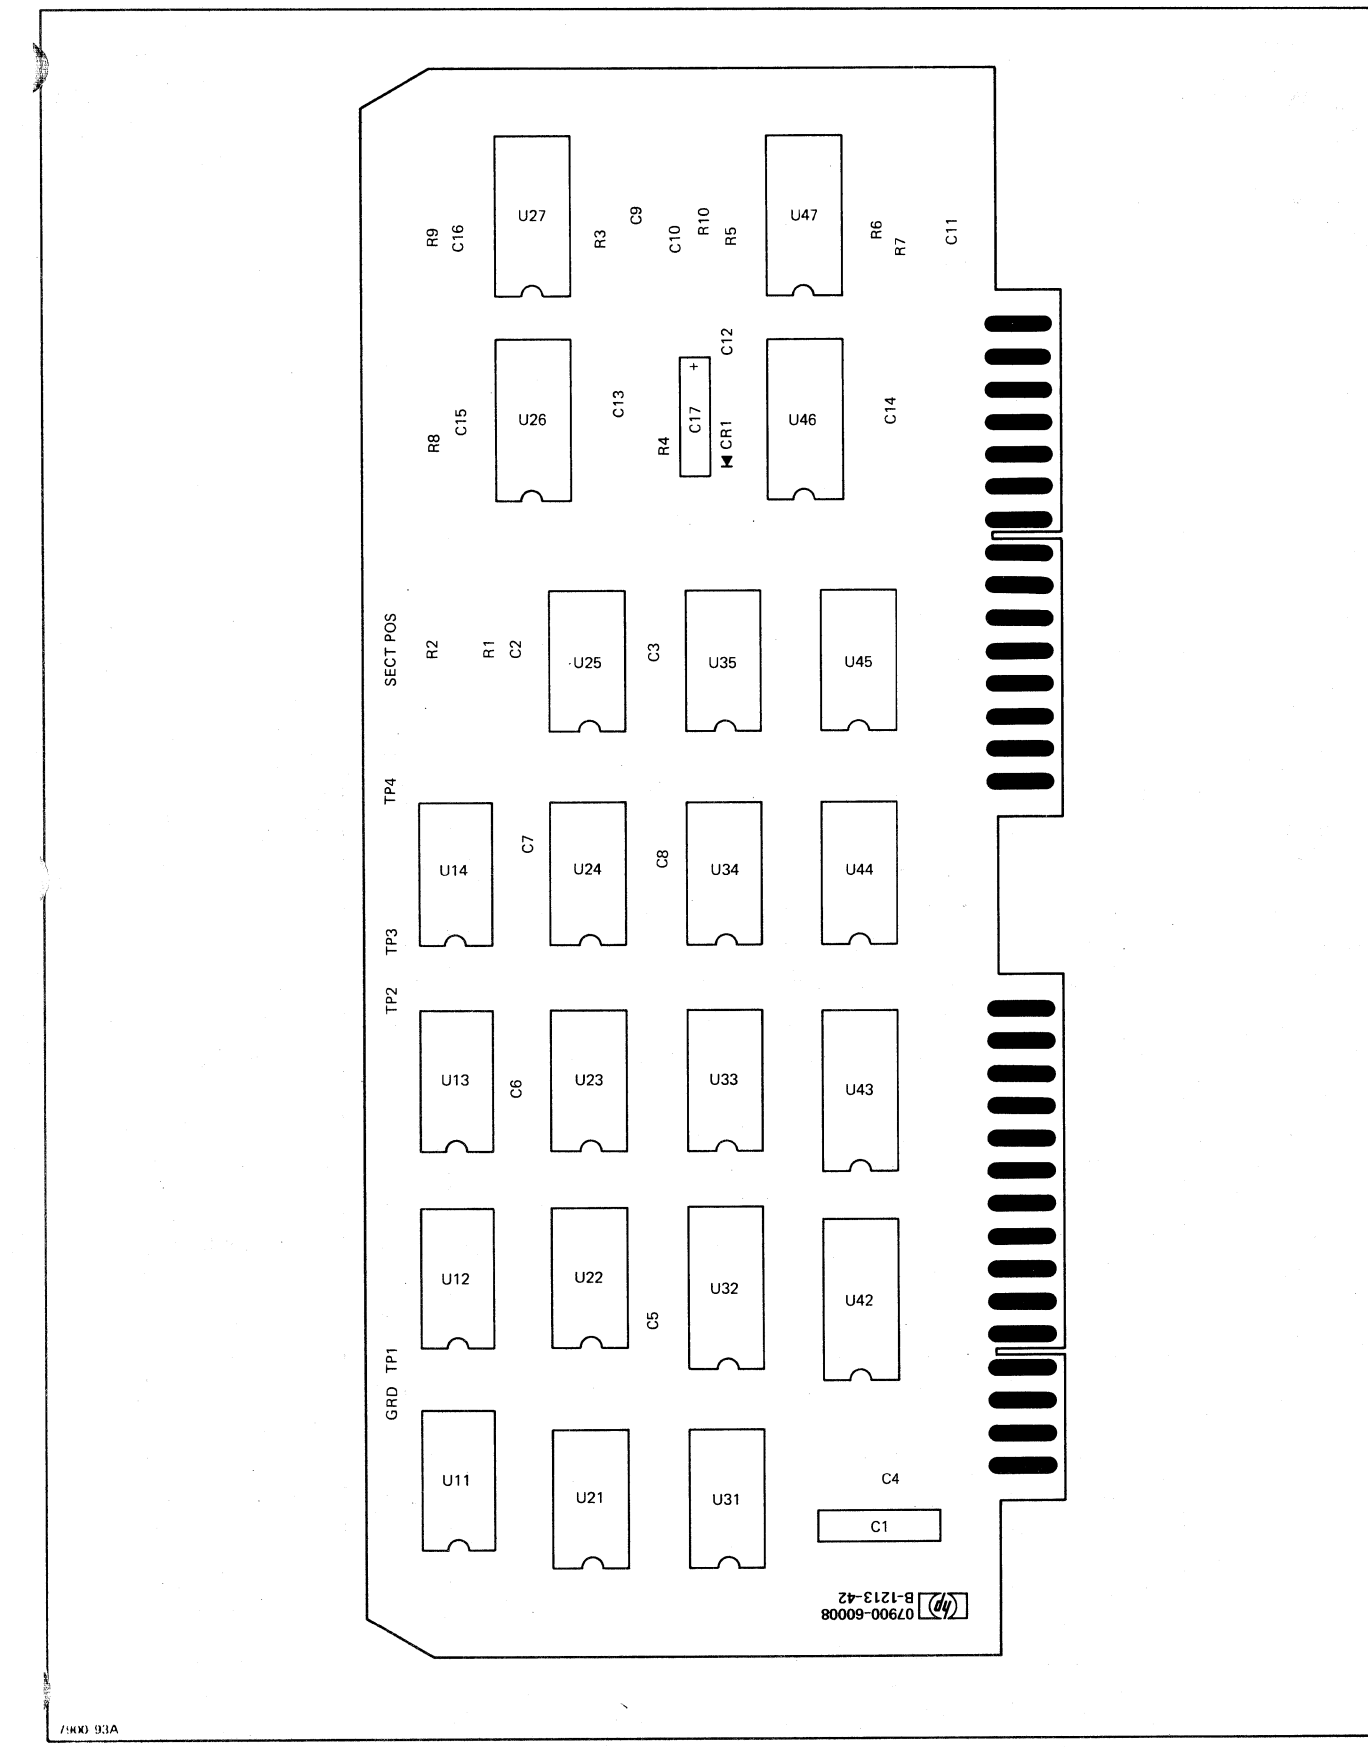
Sector Count and Compare Assembly A8 Parts Location Diagram
